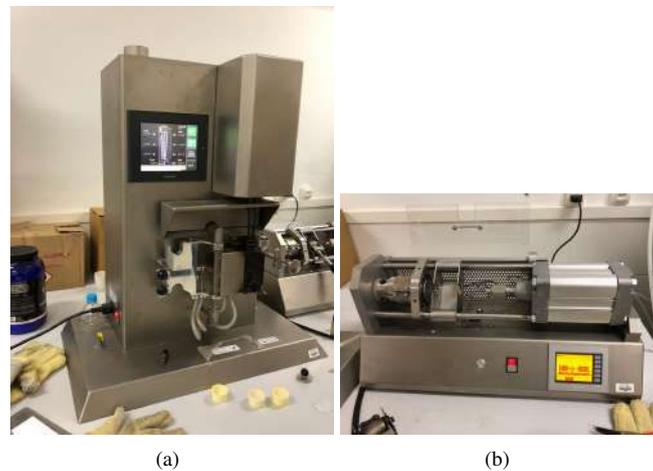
Extruder (a) and injection molding machine (b) used in this work.
